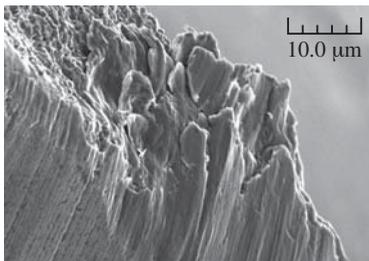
Built-up edge (lower right) and adhesion wear (upper left) on a carbide tool. (dry cutting,  $1.4\text{ min}$  @  $18\text{ m/min}$ )
